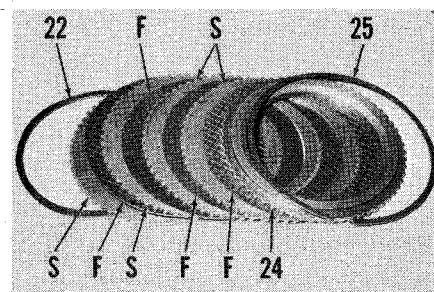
View of direct drive clutch pack showing order of friction plates (F), steel plates (S), feathering spring (22), plate (24) and snap ring (25).
